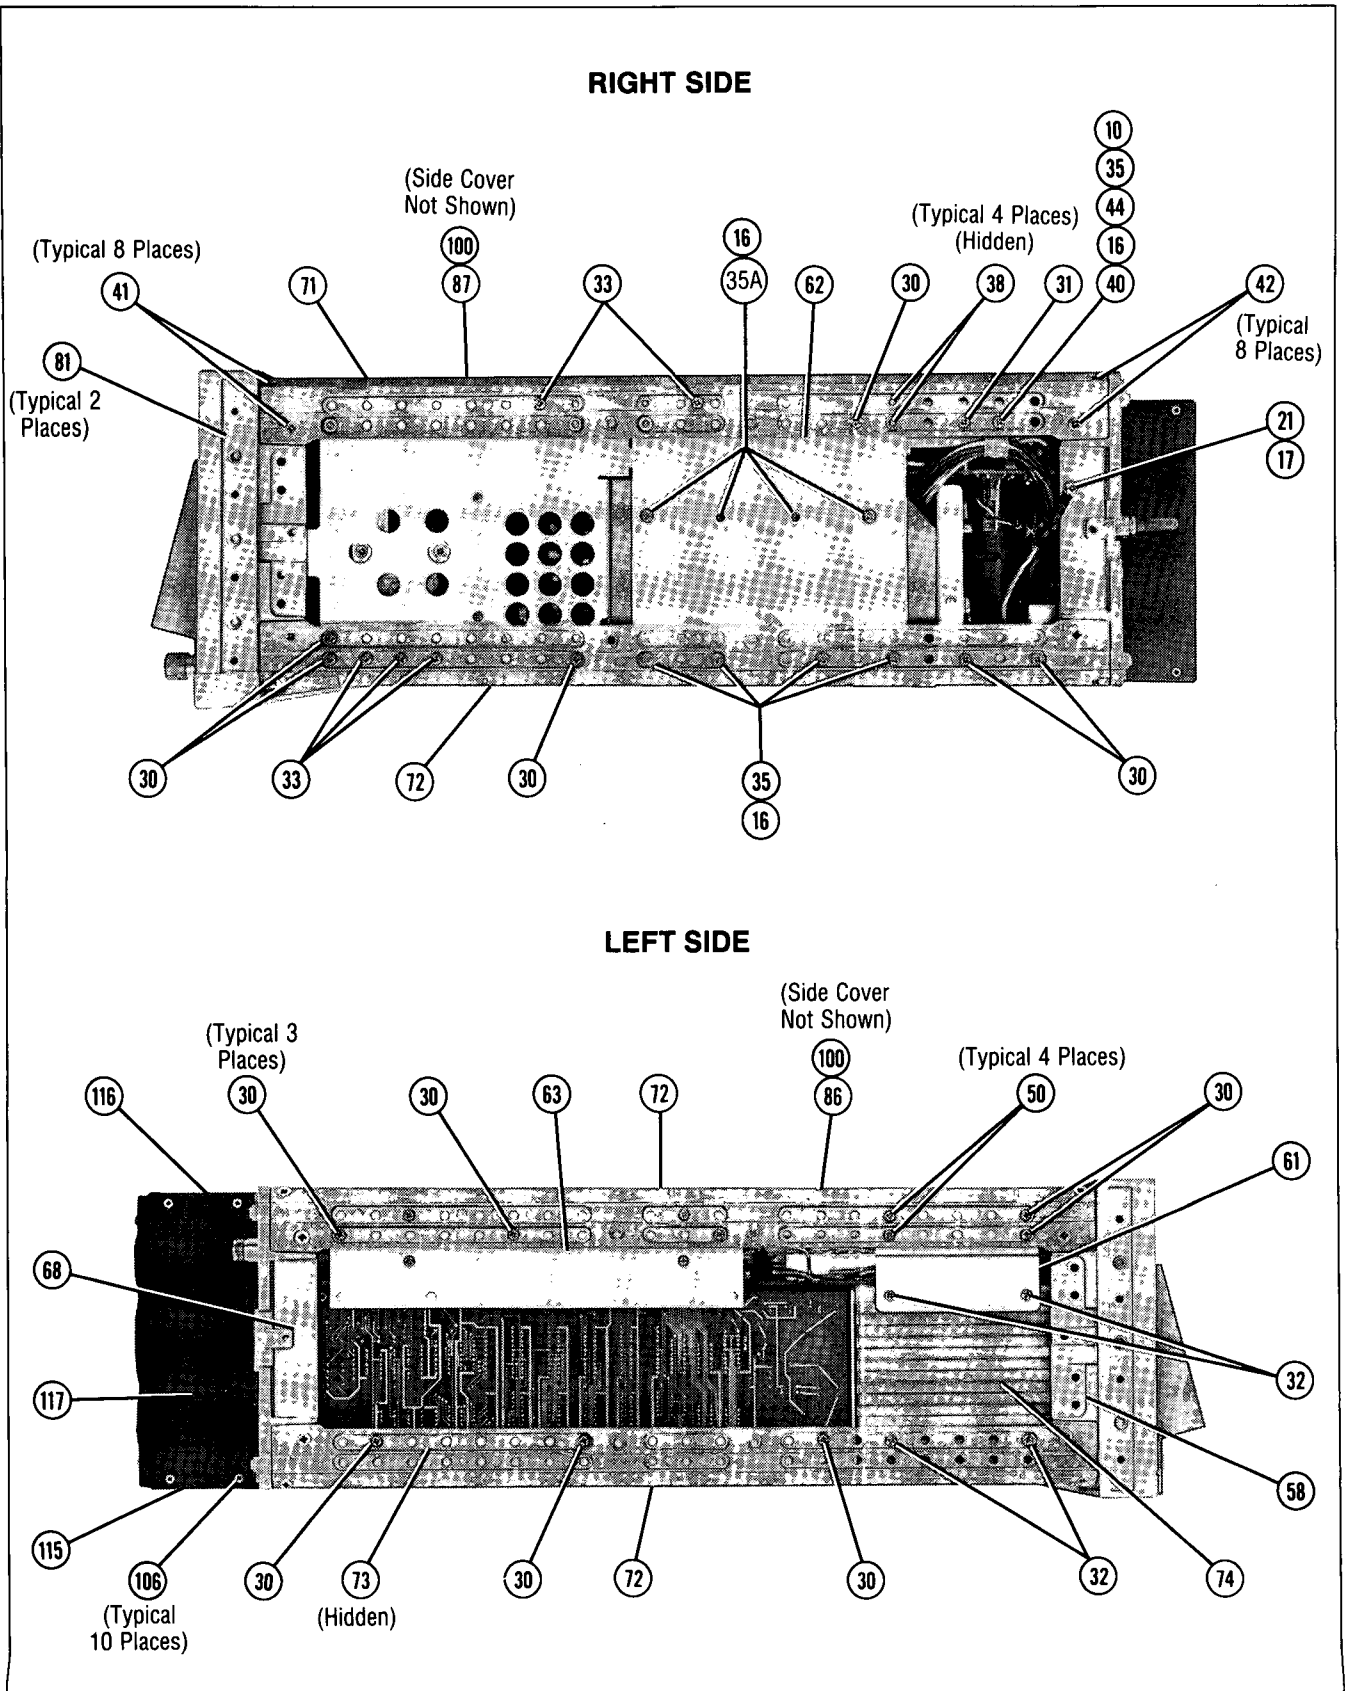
Miscellaneous Mechanical & Chassis Parts (5 of 5)
